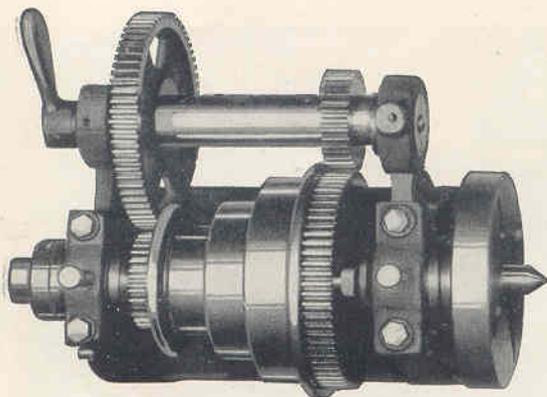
Top view of headstock with gear guards removed to show back gears.
